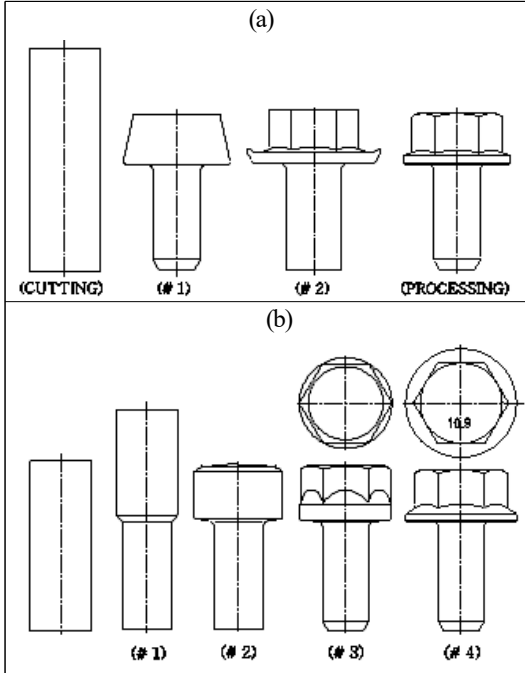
The procedural steps for (a) hot forging and (b) cold forging with an upsetting process a large flange bolt
